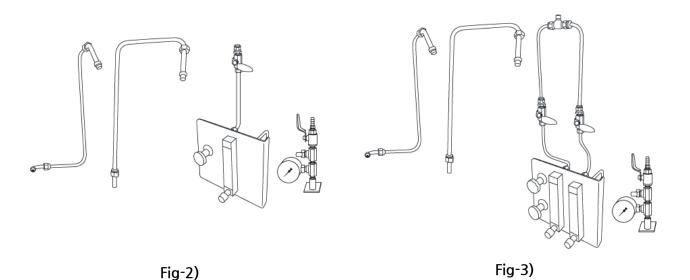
In case of Pipe parts for 2 gas channels; 1 panel of 2 Flow-meters and valves, 4 pipe lines with nuts, 1 Gas gauge with valve.
